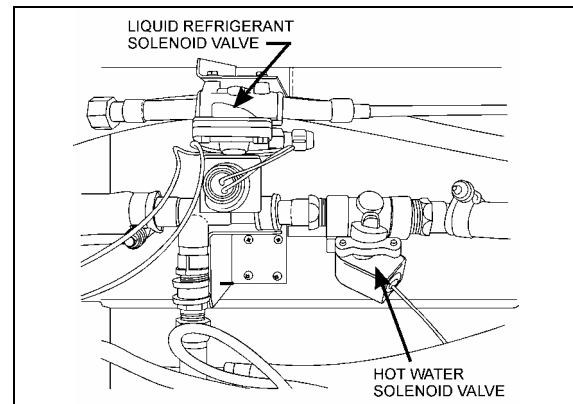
DRIVER'S EVAPORATOR LIQUID SOLENOID VALVE 22181
